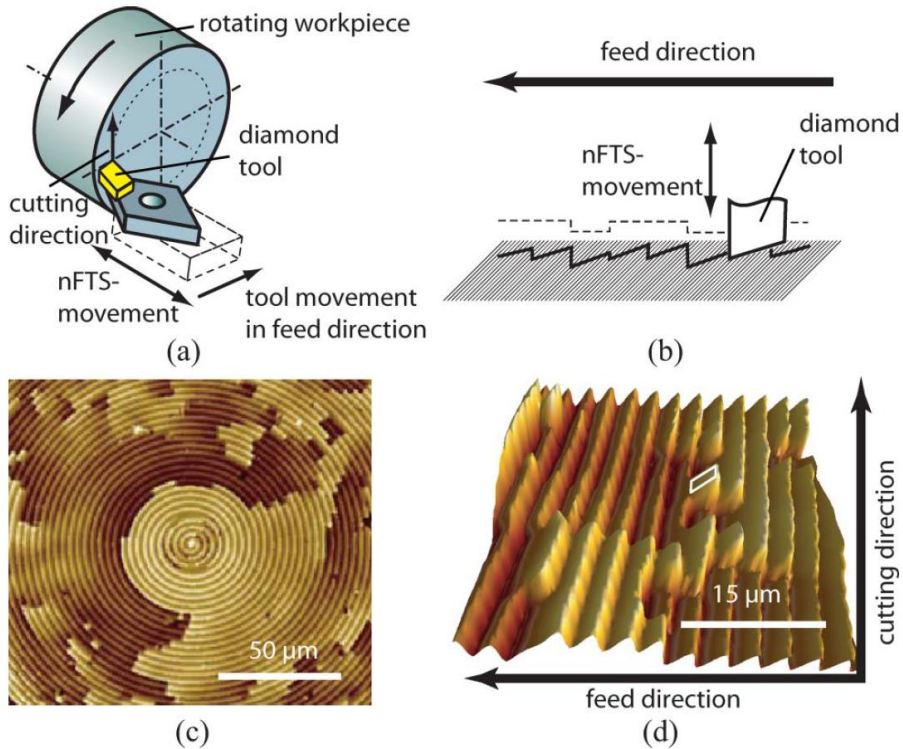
Fabrication process and resulting surface geometry. (nTFS is the position of the tool in the material). a) Scheme for the machining process for DOE's. b) Schematic structure in the feed direction and imprint of the diamond tool shape. c) Section of the surface of the DOE. d) Detailed view of the same part of the surface. The highlighted area corresponds to one single cutting depth value in the control signal of the nFTS (the highlighted area corresponds to one pixel). The maximum height difference displayed equals 700nm. Reprinted from Dankwart et.al [76].
